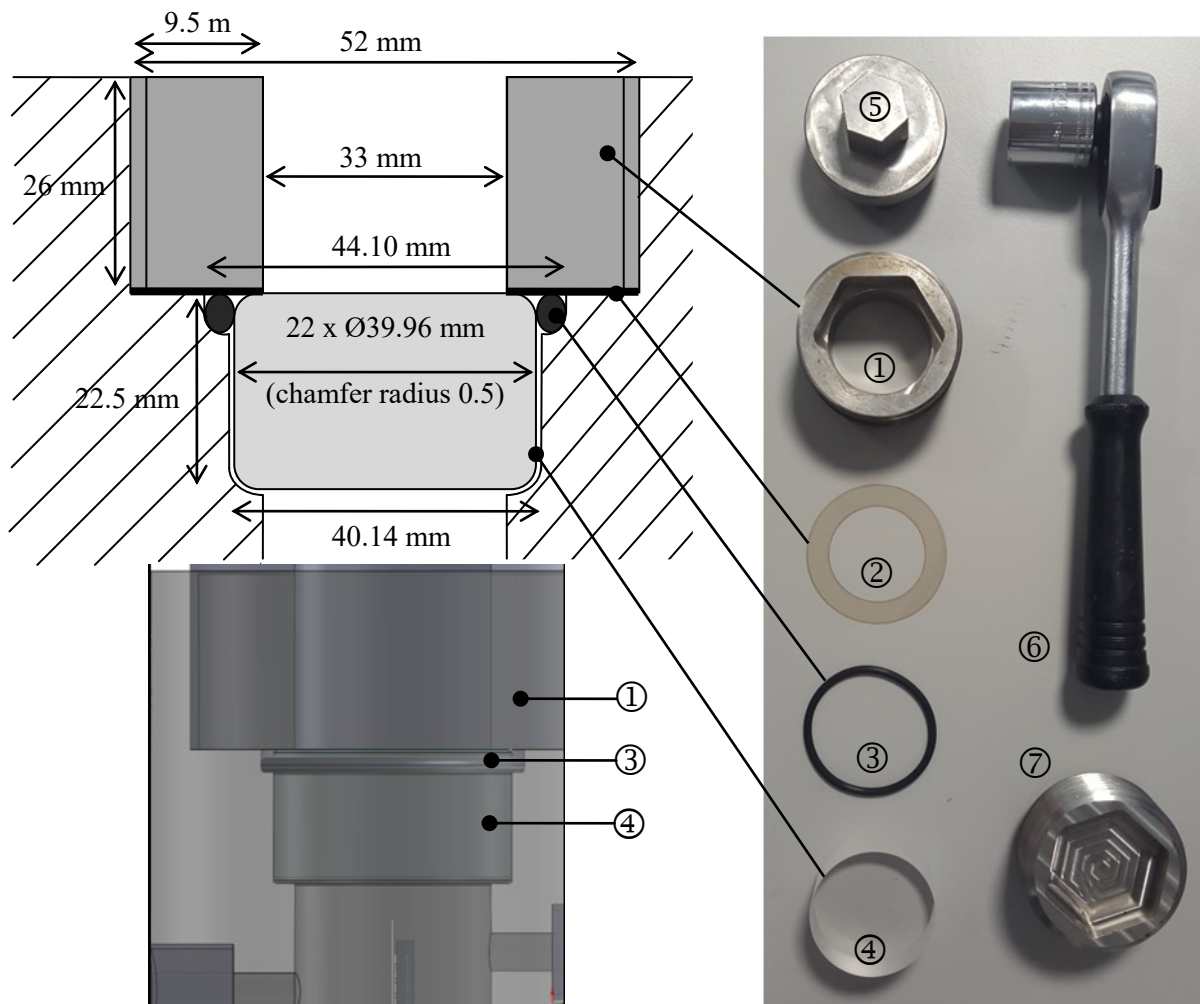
Top left.* Dimensions of the end closure components. *Bottom left.* SolidWorks assembly of the end closure in the vessel. *Right.* Manufactured end closure components and installation tools: ① stainless steel cap, ② PEEK film, ③ Viton O-ring, ④ sapphire window, ⑤ cap installation tool, ⑥ ratchet wrench socket, ⑦ stainless steel blank cap.
